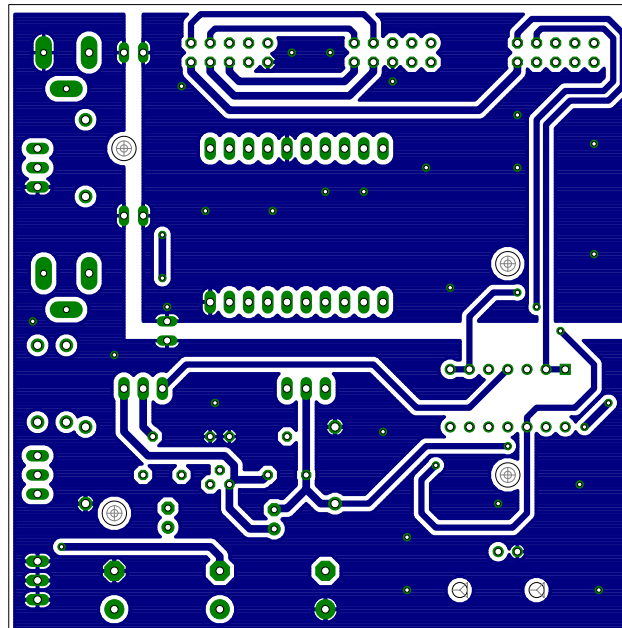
Rail splitter, amplifier, buffer and DDS pcb bottom layer
